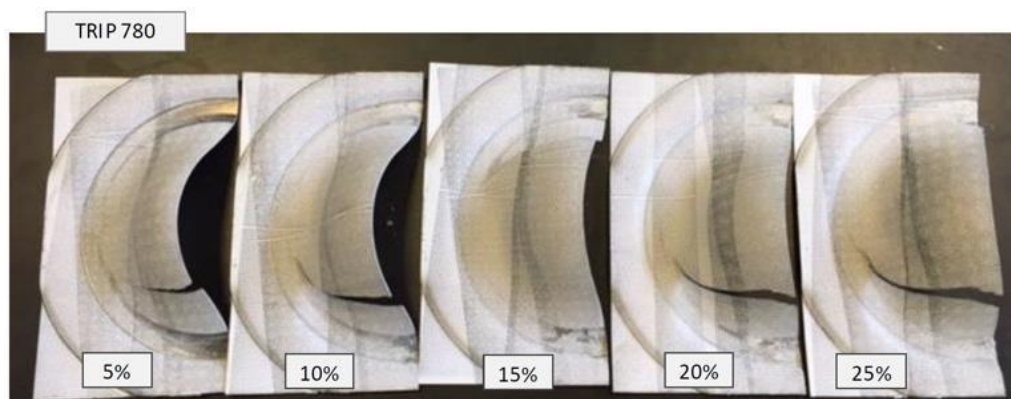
HSDT of TRIP 780 DIC sample cracks initiated at the edge between apex and bead.
